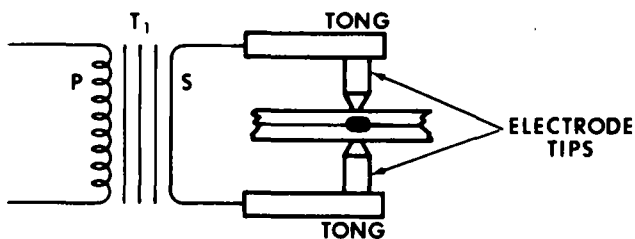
1. Resistance Spot Welding Unit With Work
